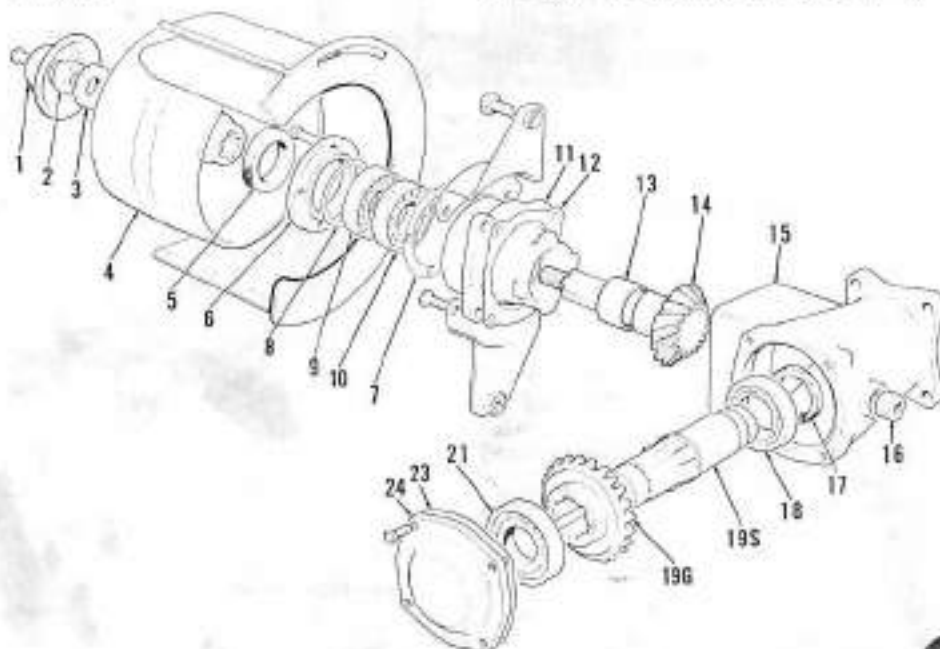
Exploded view of heavy duty belt pulley available for all models. Later models use two identical taper roller bearings at (9 & 10). Bearings (18 & 21) are both ball type. Input gear is shown at (19G) and input shaft is shown at (19S). Refer to Fig. 150 for remainder of parts identification.
